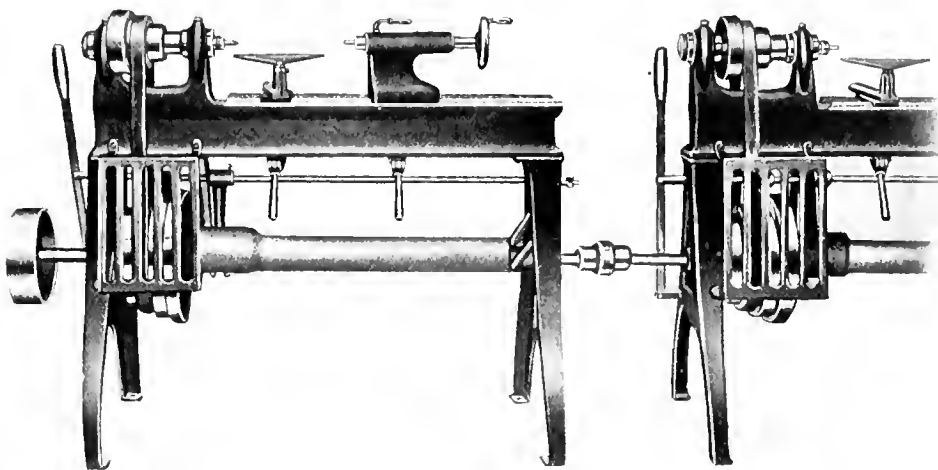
Under Drive for Speed Lathes, which avoids the Use of Countershafts
